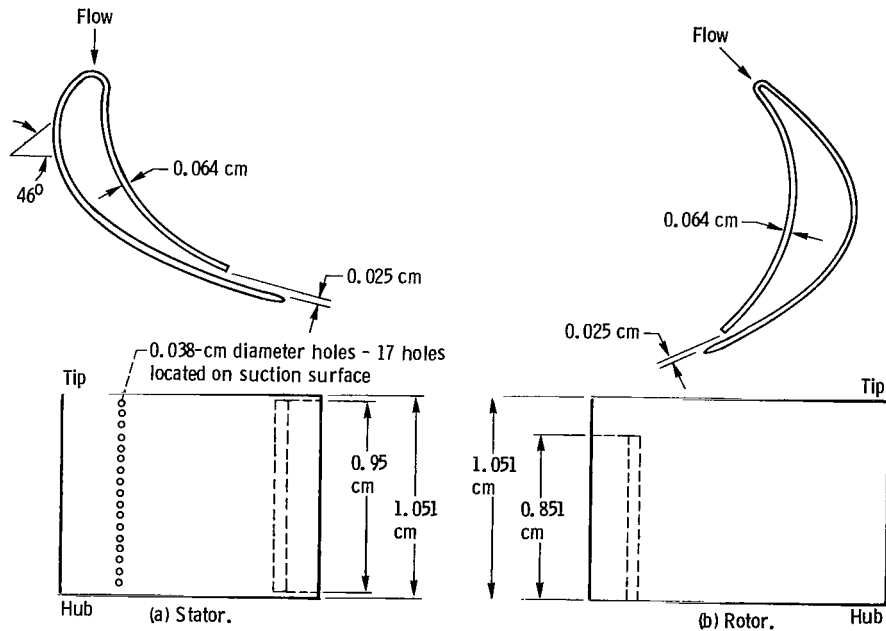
Arrangement of stator and rotor blade coolant air holes, and slots.
